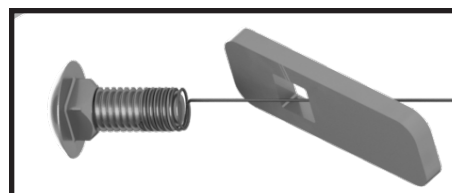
VIEW UNDER CHASSIS CHANNEL
